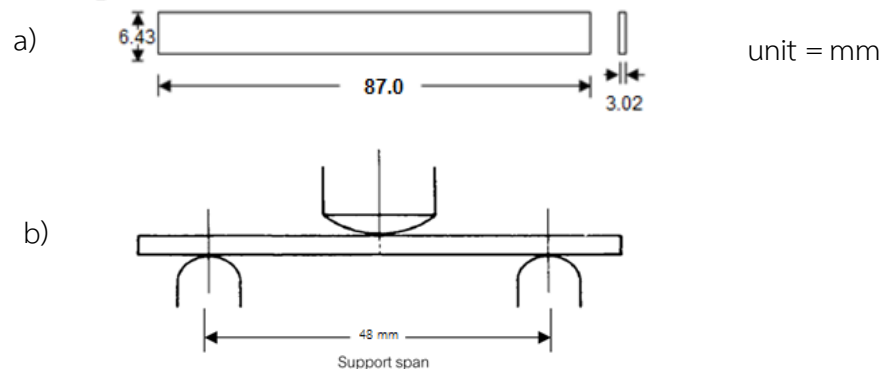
a) Dimension of flexural tested specimen and b) three point bending mode testing
